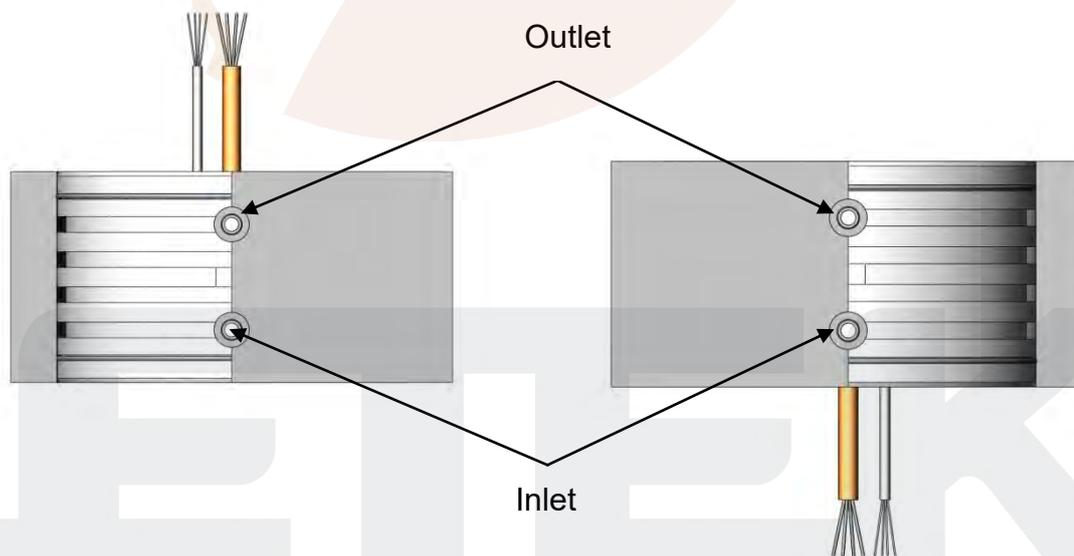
Coolant inlet/outlet position when mounted horizontally
